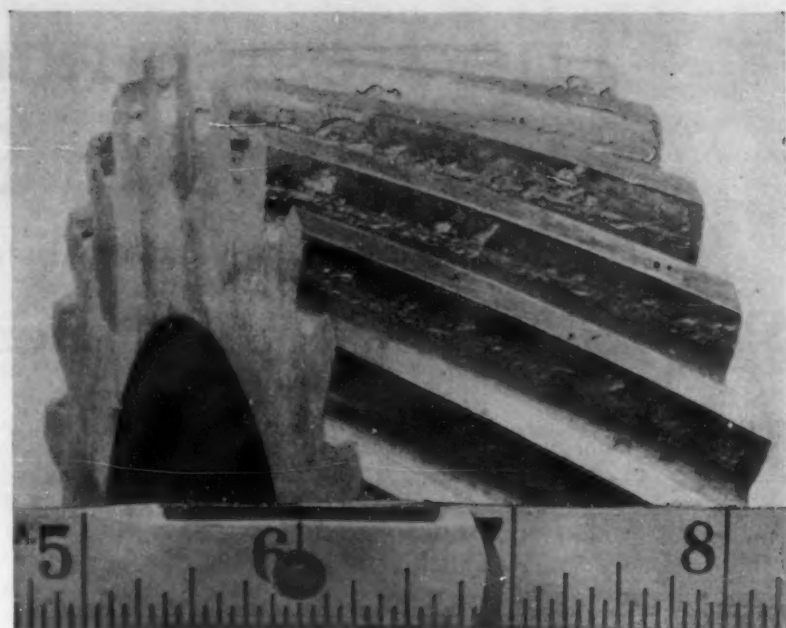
Fig. F. Fatigue failure of reduction gear pinion from excessive compressive stresses.
